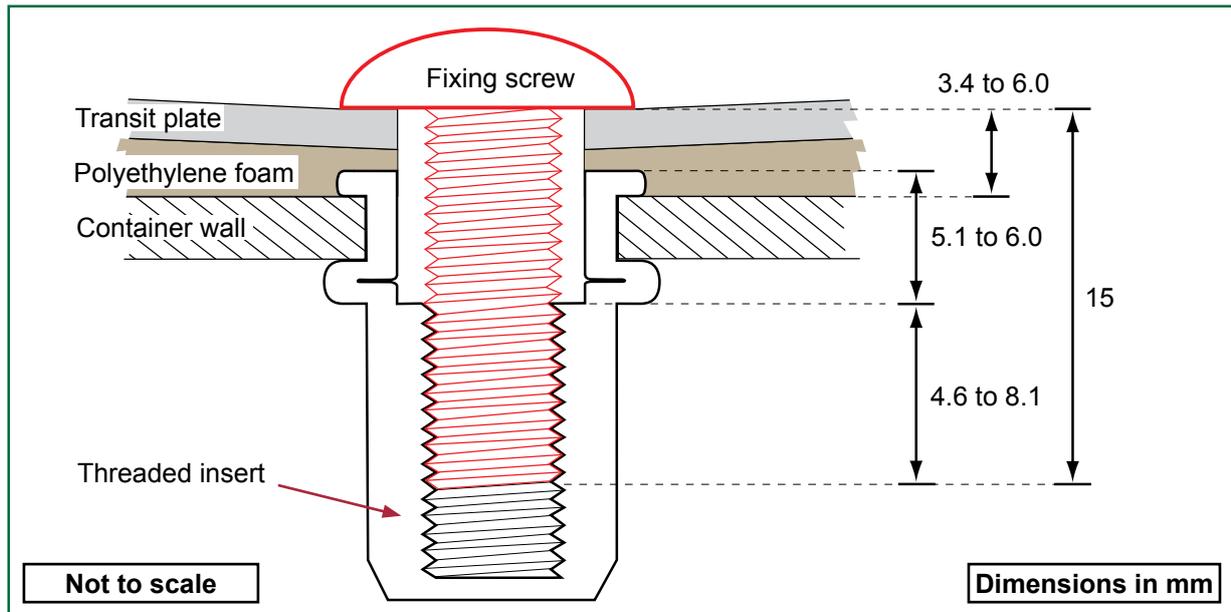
Cross-section through a typical bolted joint used on CPIU 9006609
